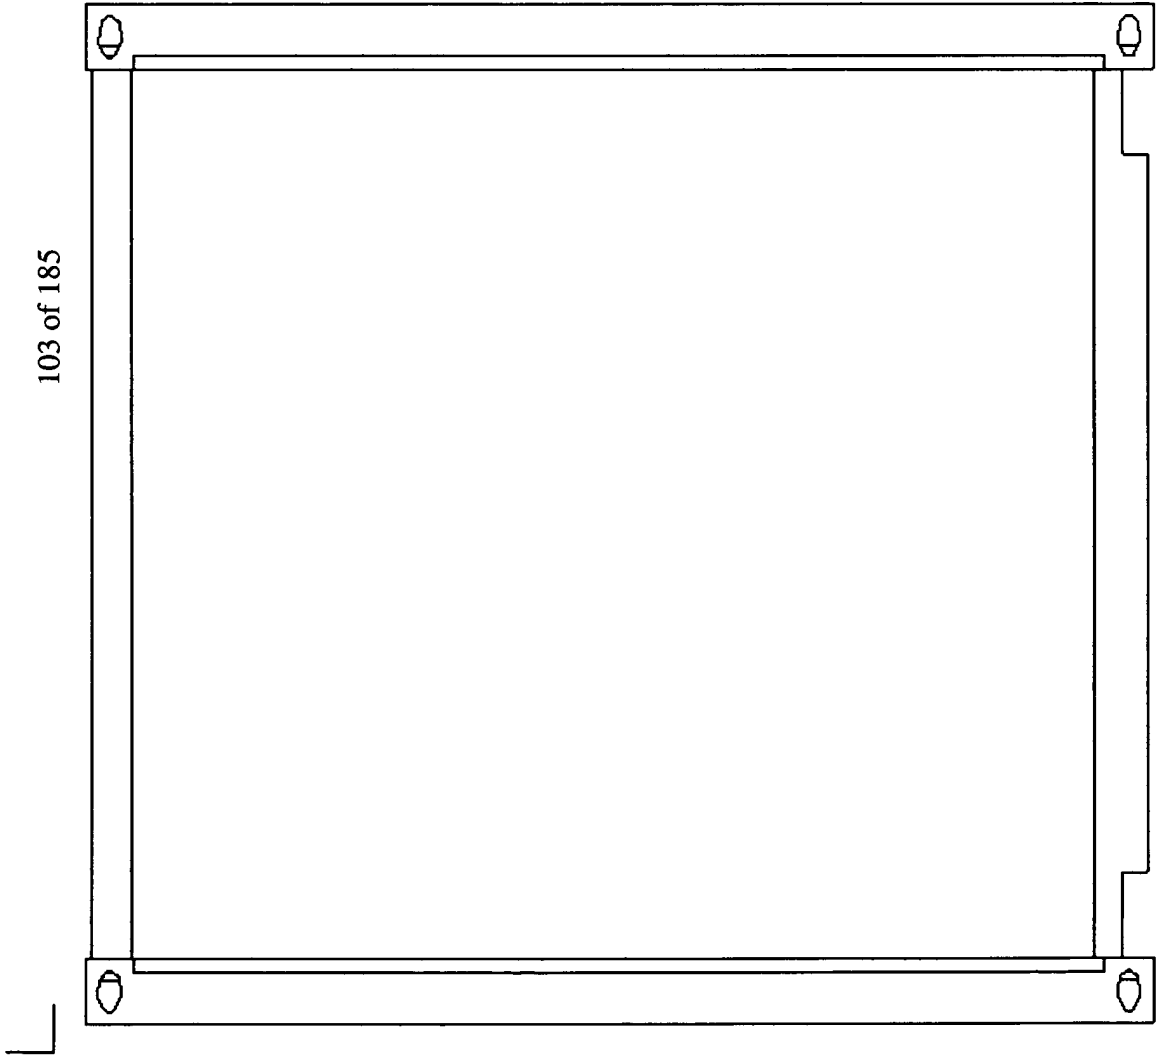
C: External view of a right frame (20 foot collapsible cargo container)
